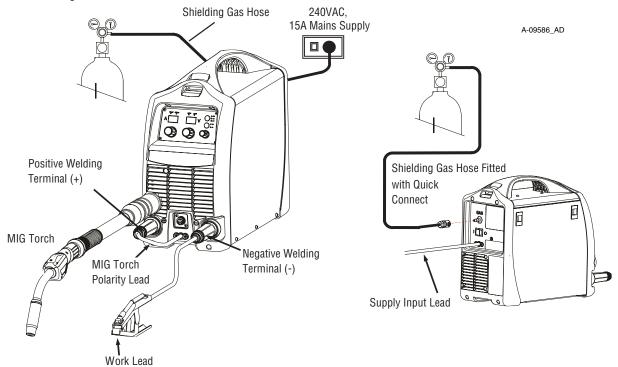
Setup for Mig Welding with Gas Shielded Mig Wire
